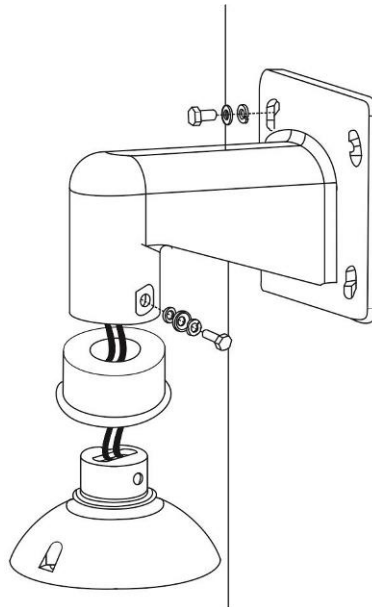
Wall Mount: Compact Wall Mount + Mount Kit
